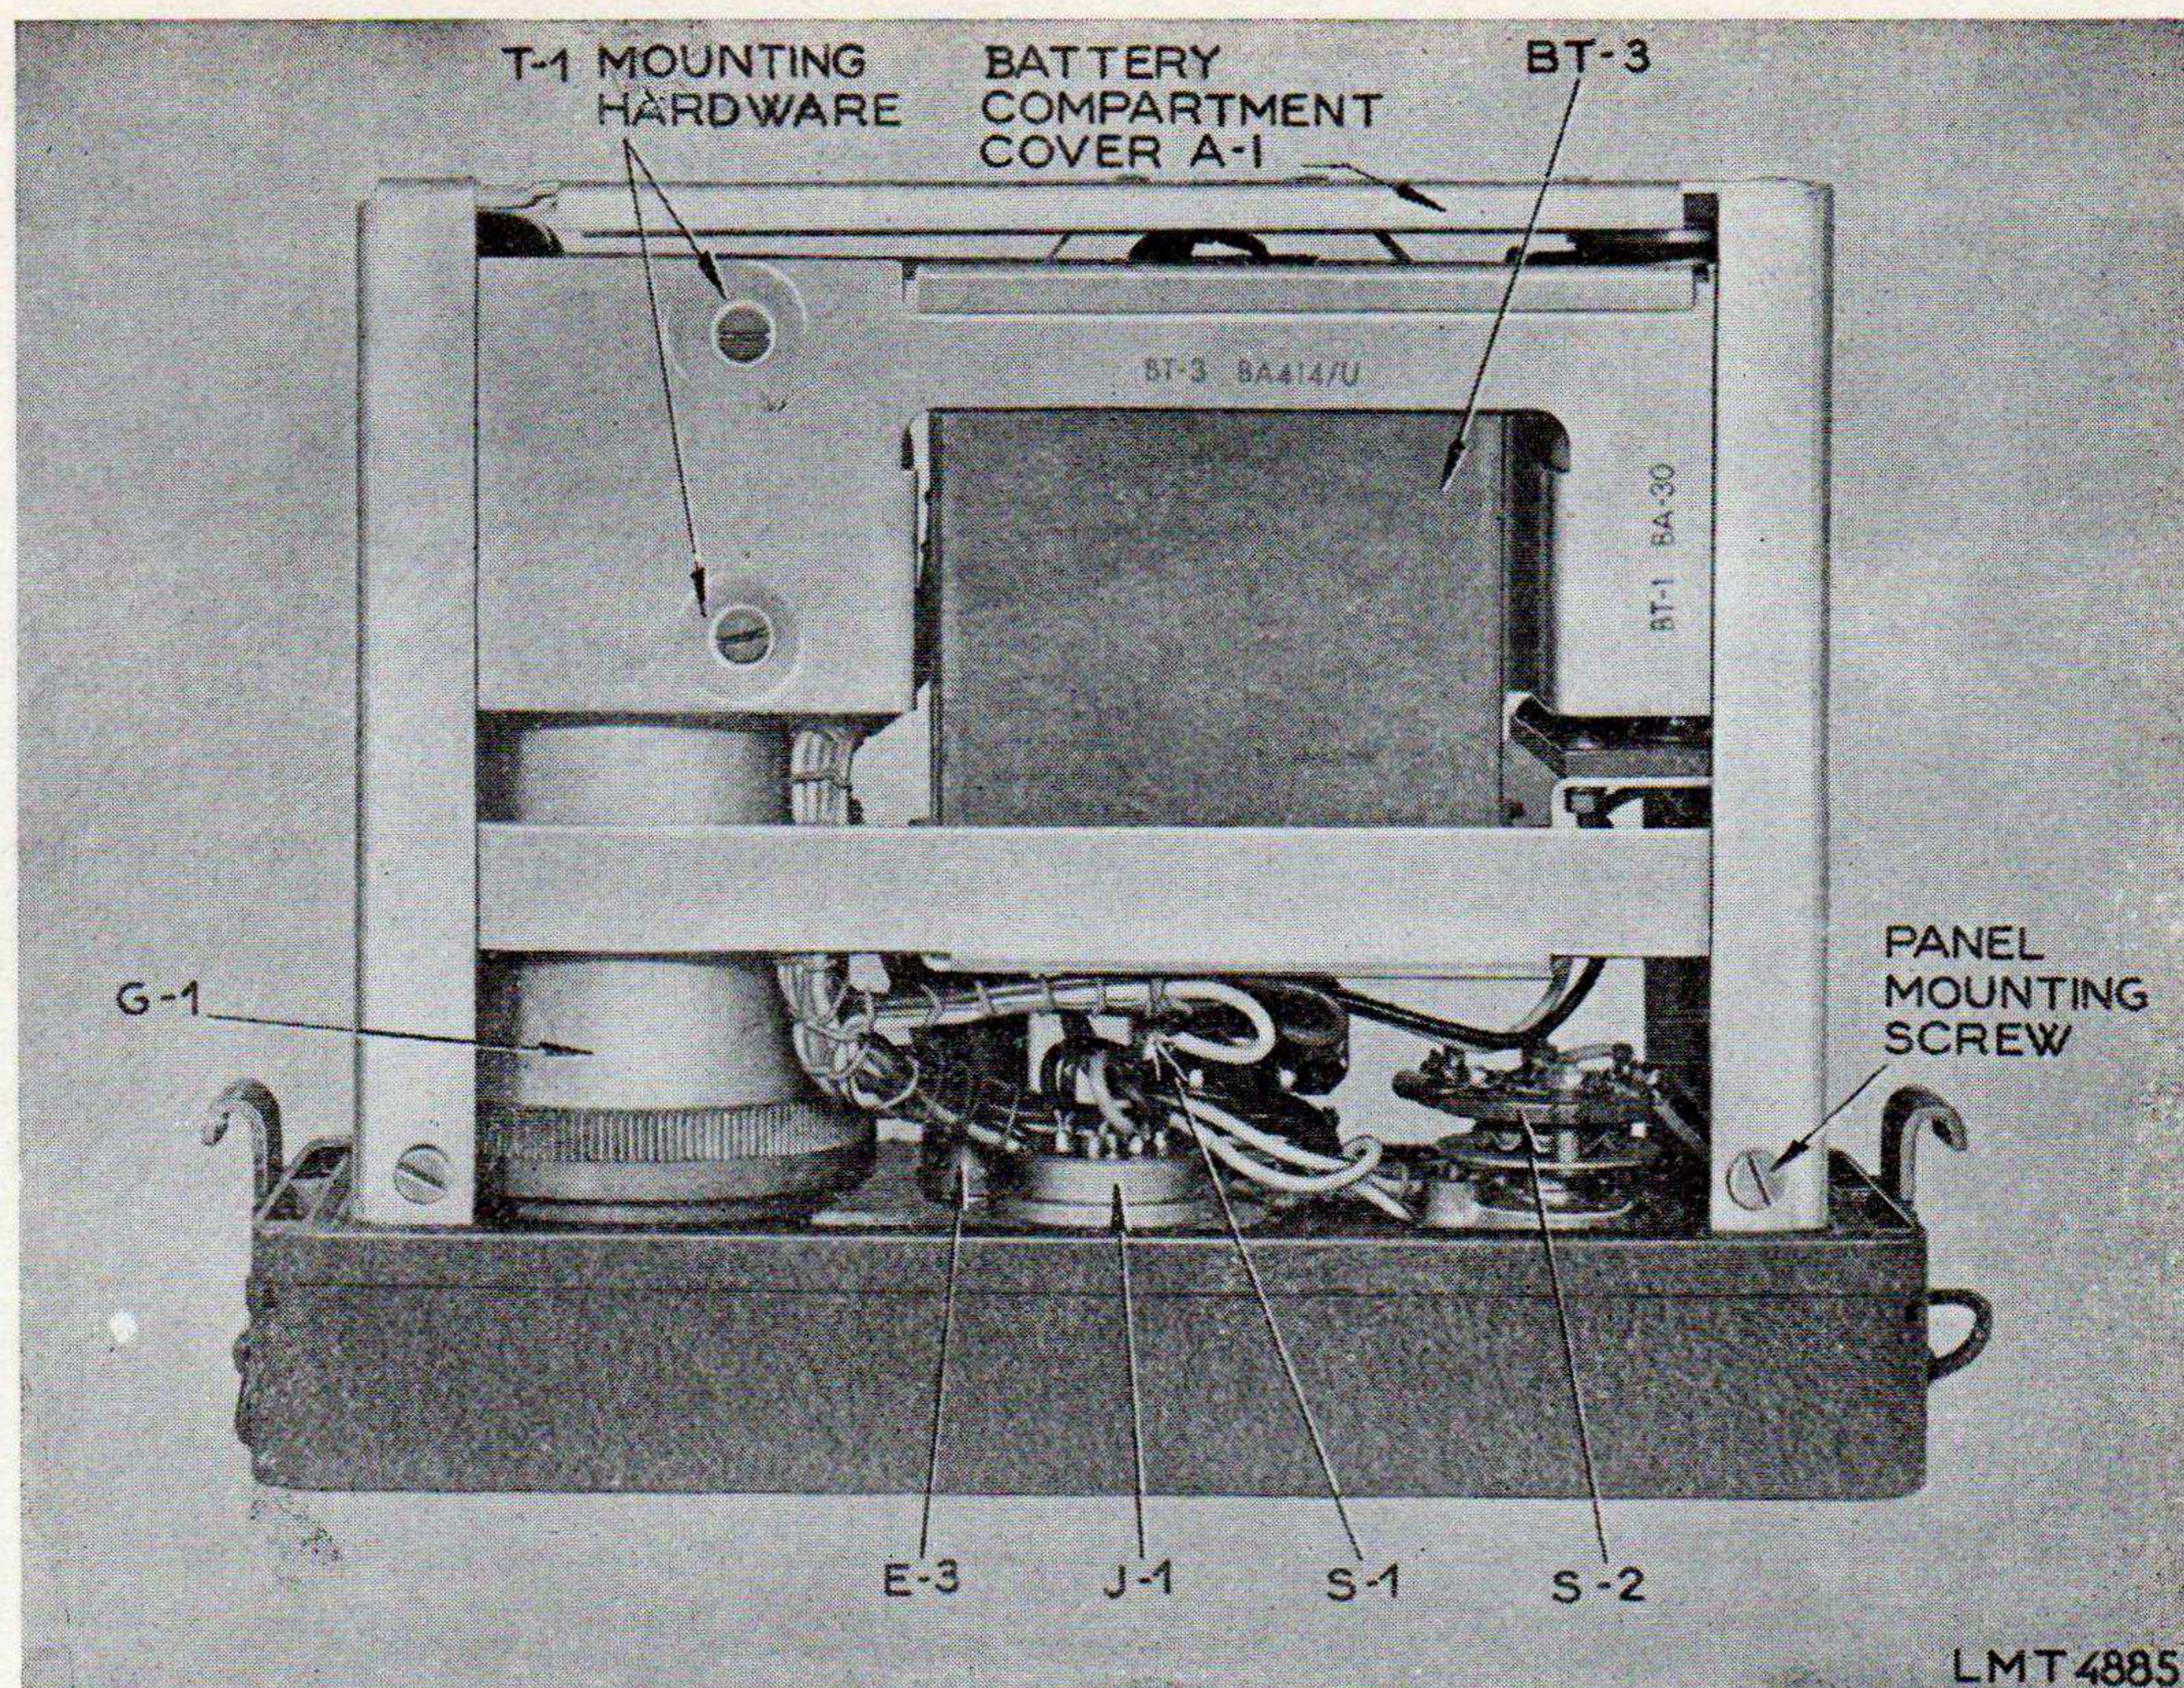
Remote Control C-433/GRC, panel-and-chassis assembly, cover removed, bottom view of chassis.
